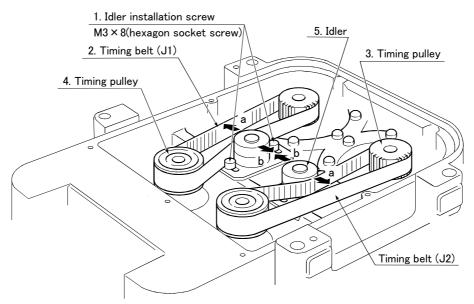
Inspecting, adjusting and replacing the lower base timing belt
